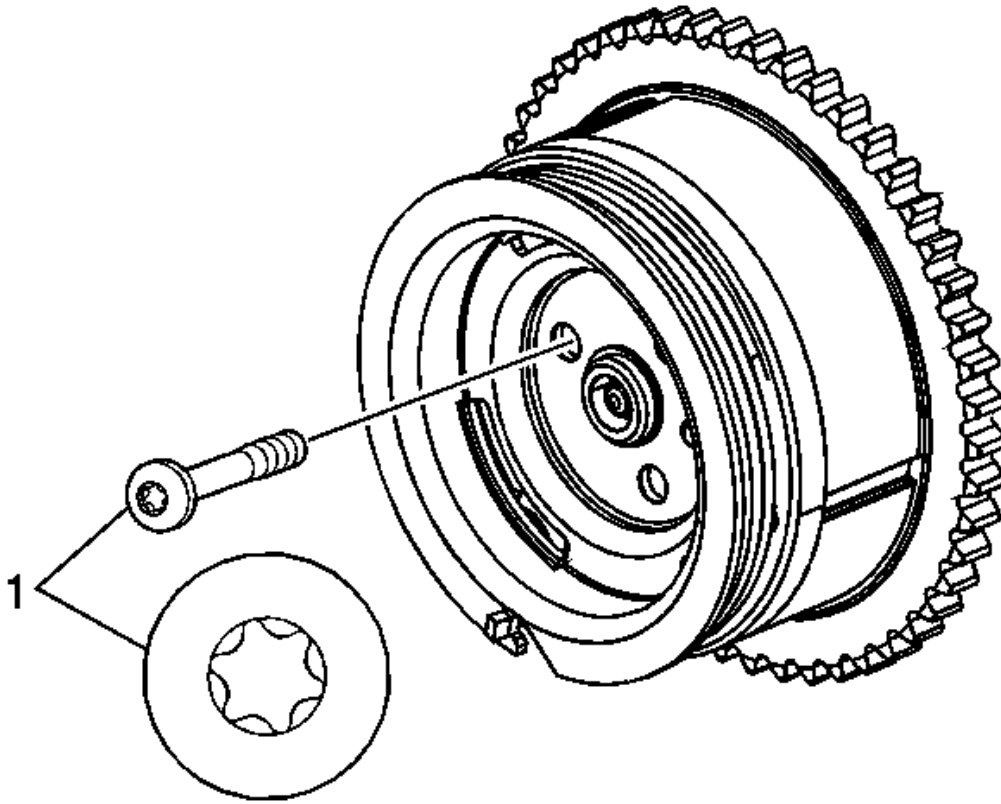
Identifying Camshaft Position Actuator & Fasteners
